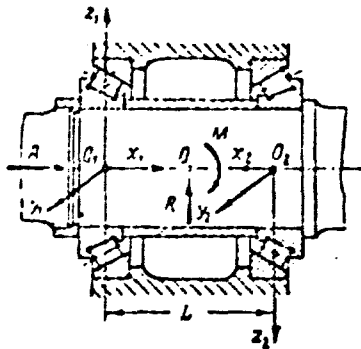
Diagram of loading of two tapered roller bearings by radial and axial forces and the moment.
